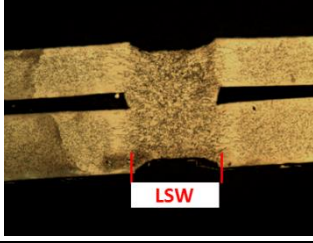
Cross-sectional view of lap joint with gap between welded parts
